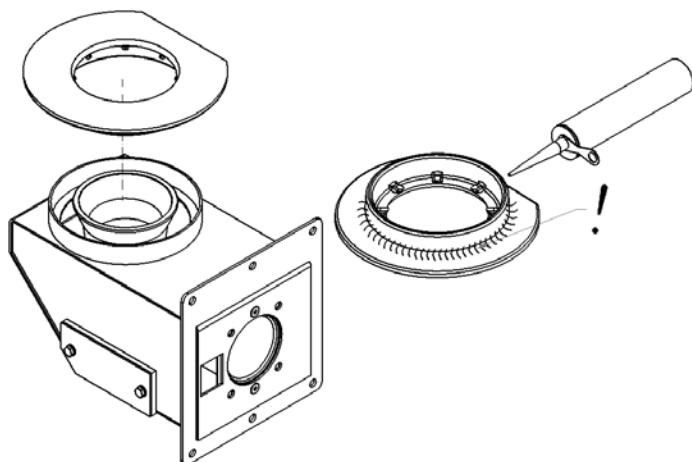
Boiler conversion from the right-hand to left-hand design – dismantling of burner and blind flange
